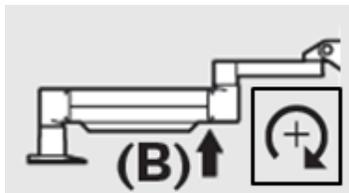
With Arm Horizontal, Tighten Set Screw (B)
